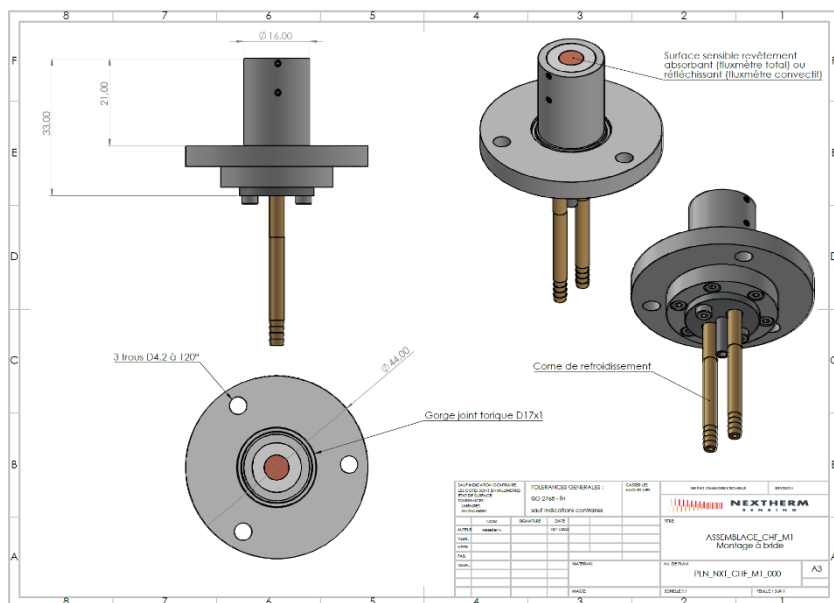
CHF heat flux sensor with three-hole flange-mounting interface at 120° (reference M1)
